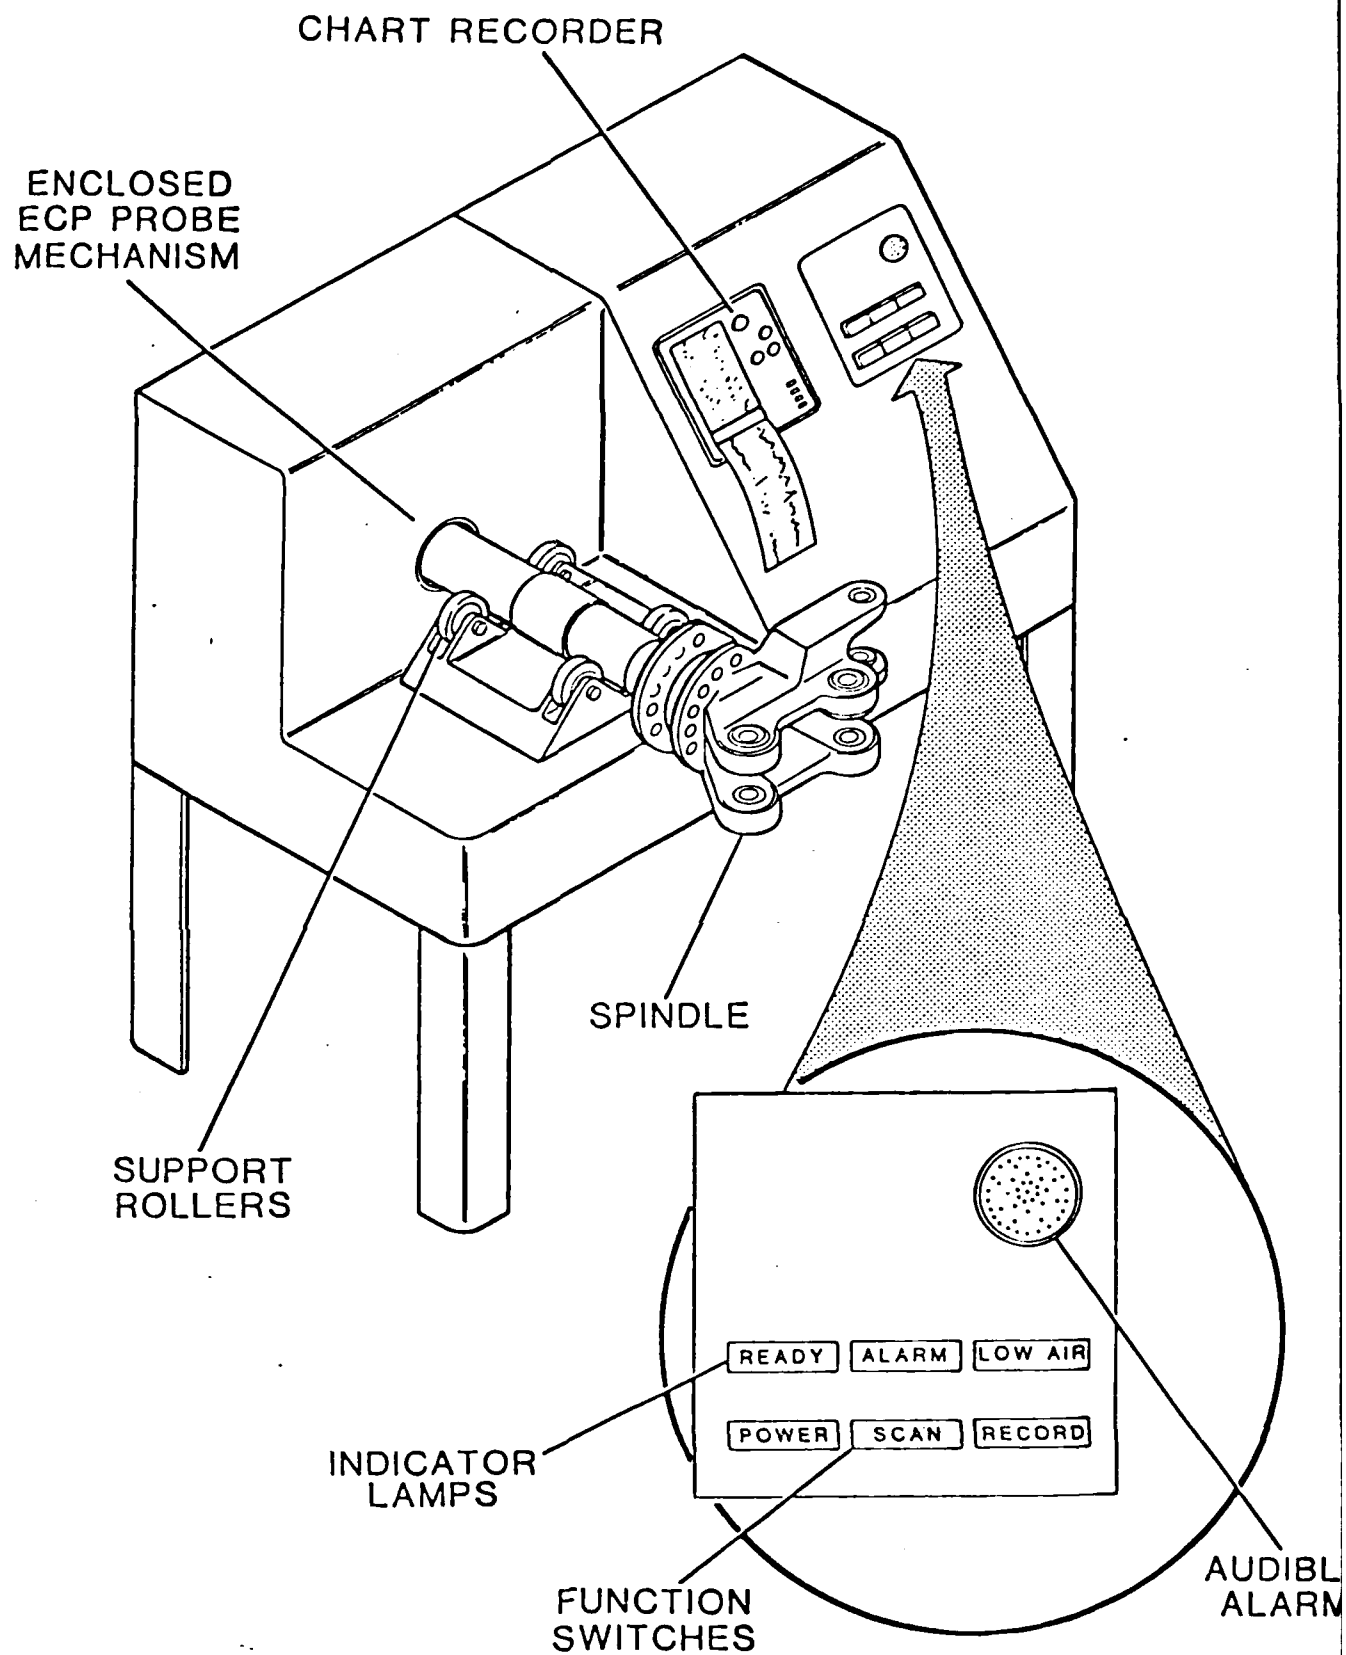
CONCEPTUAL DESIGN OF ECP INSPECTION SYSTEM WITH SPINDLE REMOVED FROM HELICOPTER
